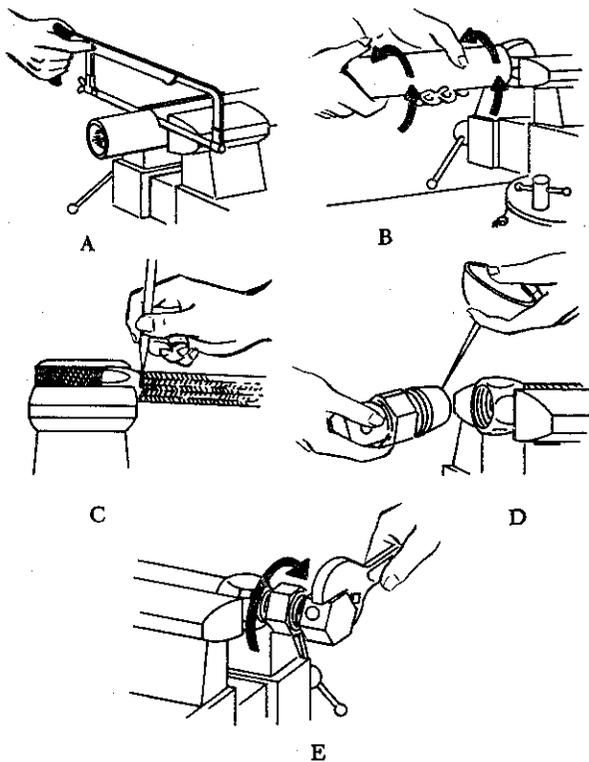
Assembly of MS fitting to flexible hose.
